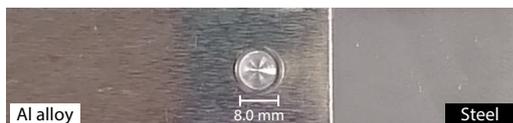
Appearance of Test Piece (Showing the Joint in the Center)
